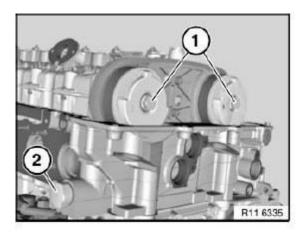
Identifying Chain Tensioner And Central Bolts Courtesy of BMW OF NORTH AMERICA, INC.
